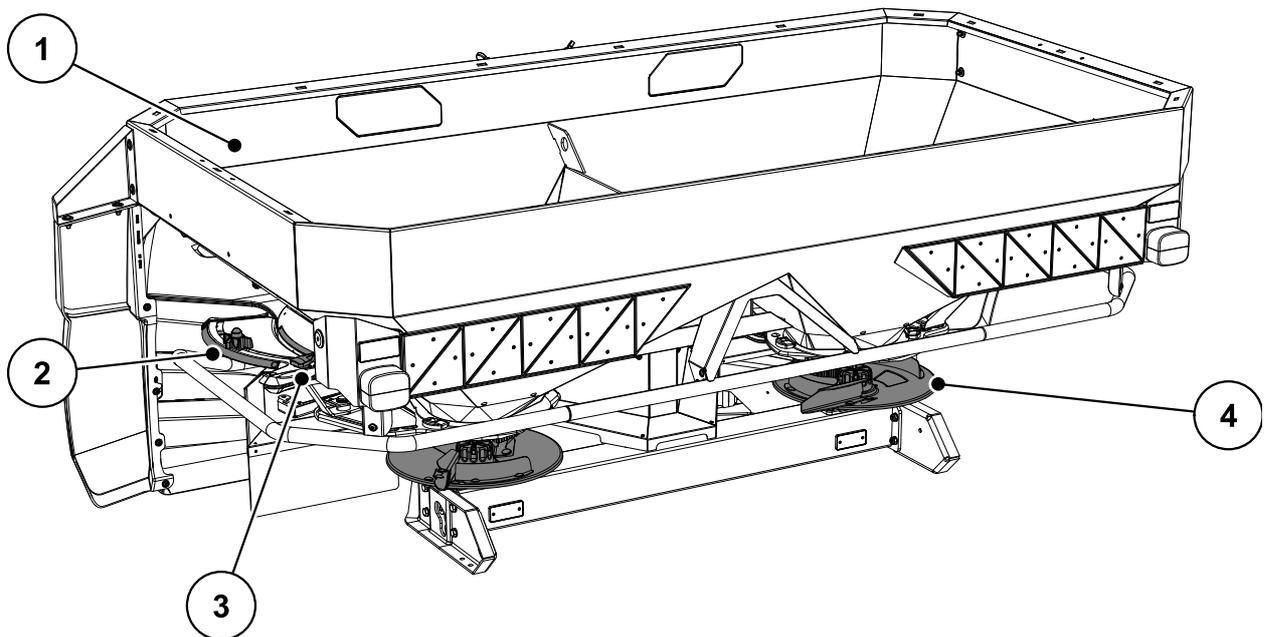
Assembly overview: Example AXIS 30.1 - Rear
